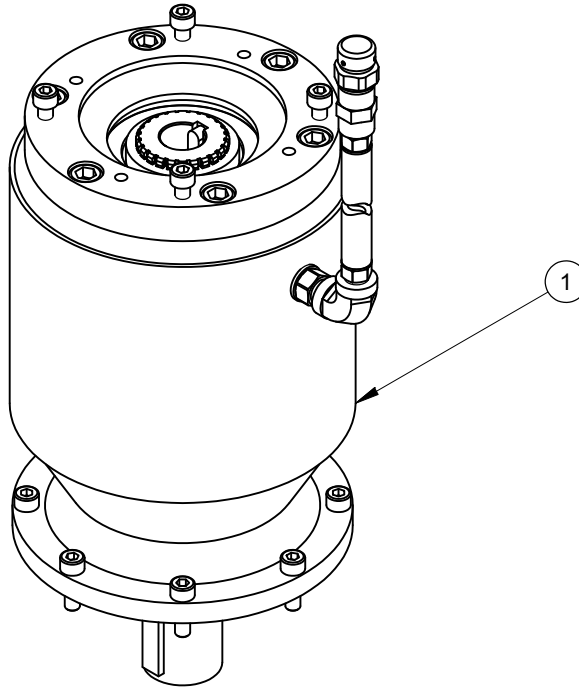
MILLING HEAD ASSEMBLY PARTS LIST 2 (P/N 72277)
